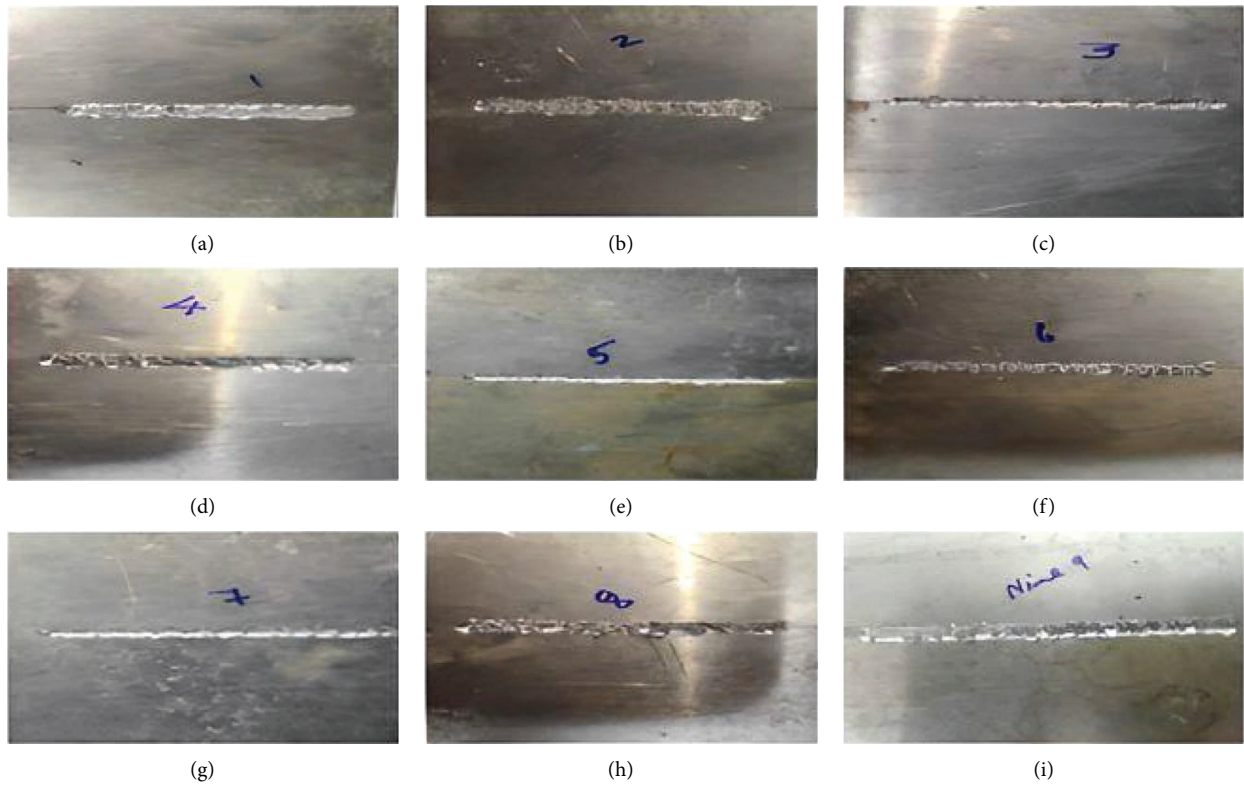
Robot microfriction stir welded L9 samples.
